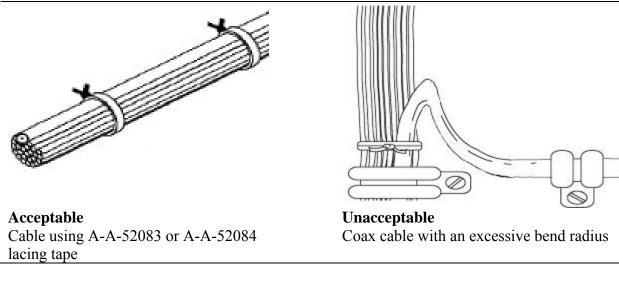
Examples of acceptable use of lacing tape and a coaxial cable with excessive bend radius.
